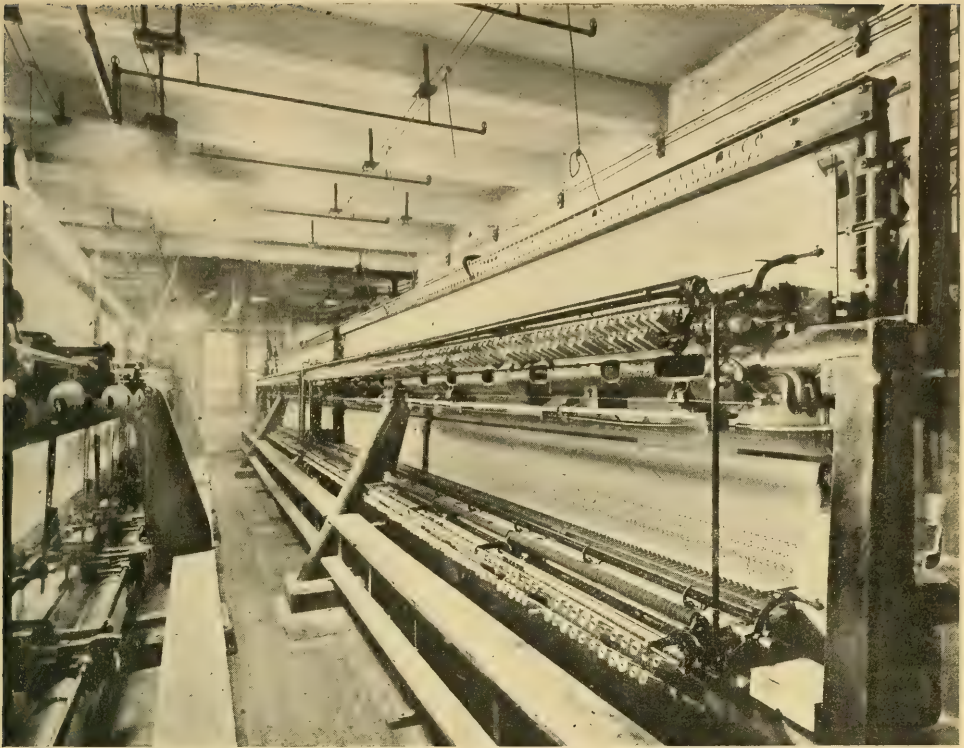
PERSPECTIVE VIEW OF EMBROIDERING MACHINE TAKEN BY COOPER HEWITT LIGHT.
